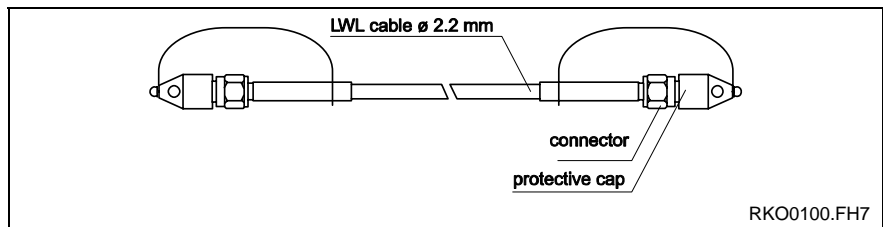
RKO 0100 Fiber Optic Cable Assembly
